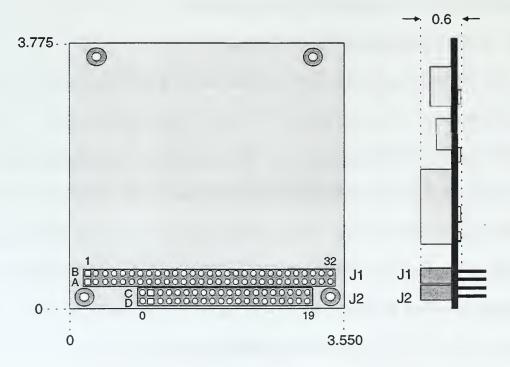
Basic Mechanical Dimensions, 16-bit PC/104 Module [Ref. 16].
